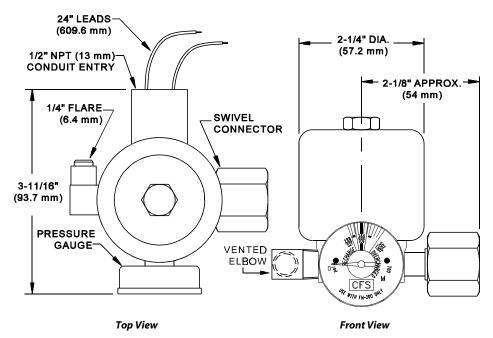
A - Solenoid Pilot Valve Assembly - S/N 20610276
